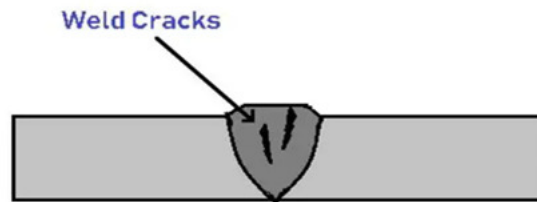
Representing the Crater Cracks in weld [The Engineers Post].
